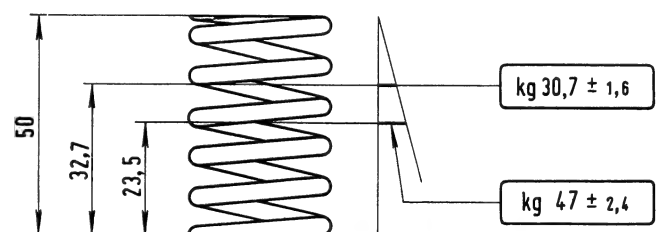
115 C.005 engine outer valve spring testing data.
